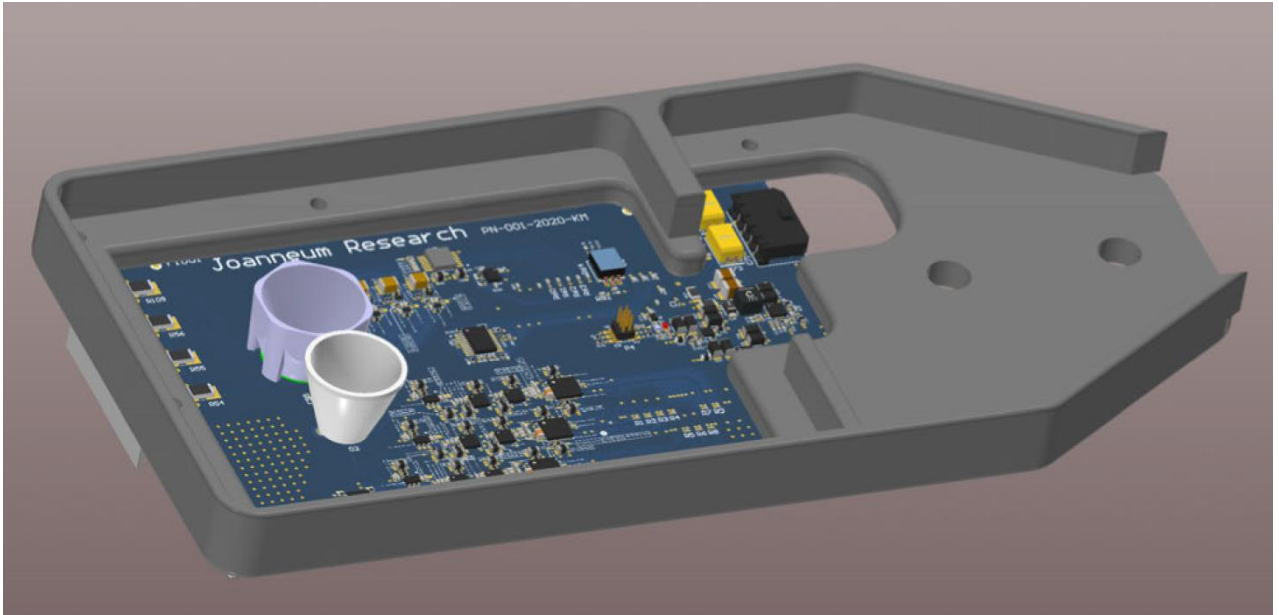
3D model of the VLS unit 2.0 & 3D printed housing [21].
